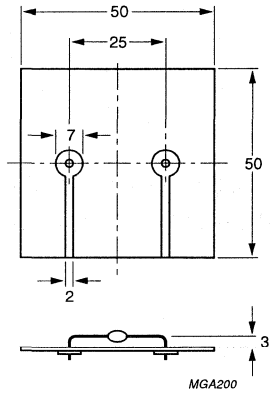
Leaded device mounted on printed-circuit board 50 × 50 mm.
